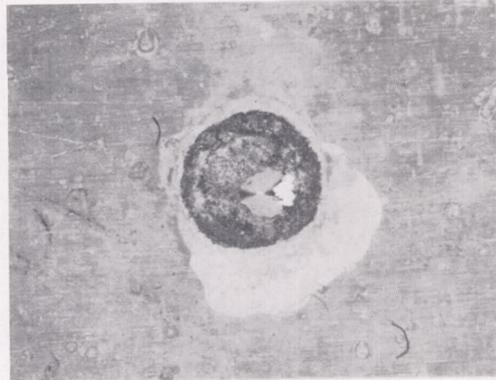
Type P. Weld completely penetrated at one place and through one thickness of sheet in balance of weld, X3.
